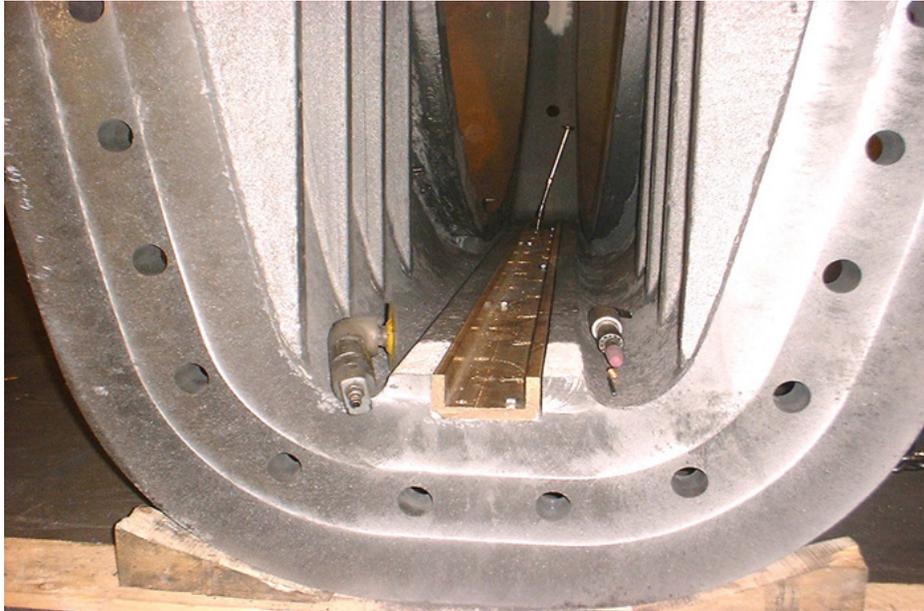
extruded aluminium bronze channel fixed onto metal seated gate valve body
